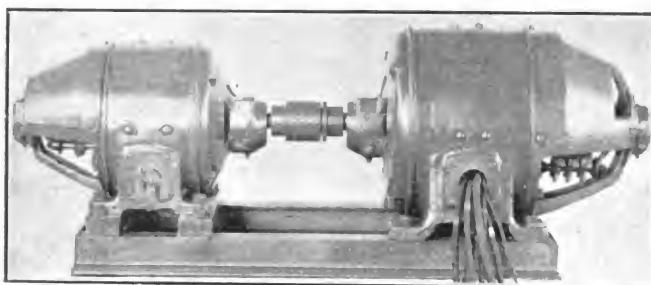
Compound generator (4 KW at 1,700 r.p.m., 60/20 V.) driven by shunt motor (7 1/2 h.p., 1,700 r.p.m., 230 V.) for welding uses
